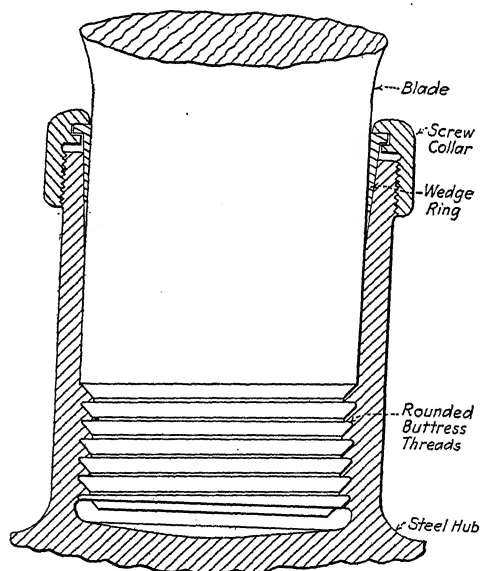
Section through screw-type hub for aluminum-alloy propeller.
